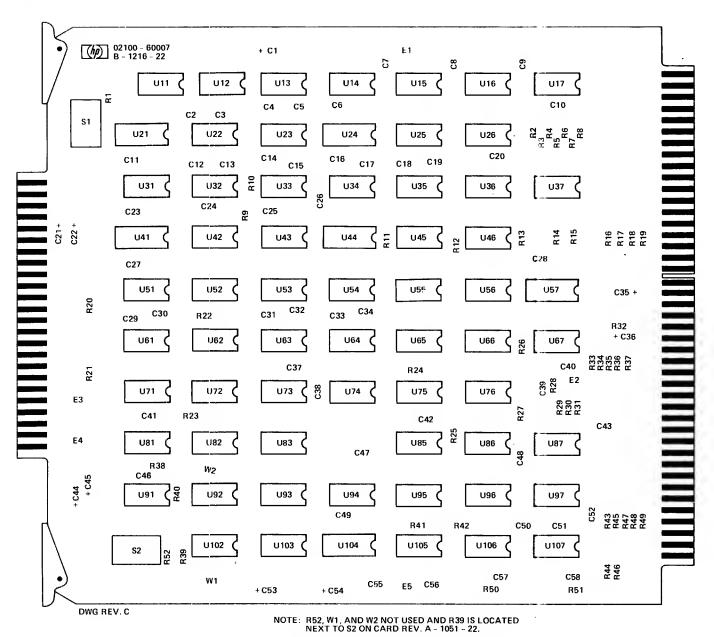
A8 I/O Buffer Card, Parts Location Diagram
